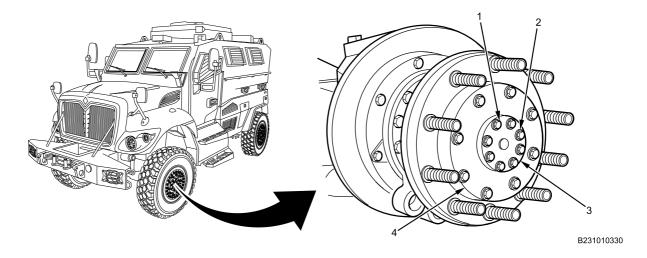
Hubcap Removal. Brake Shoes and Hardware Removed for Clarity.
